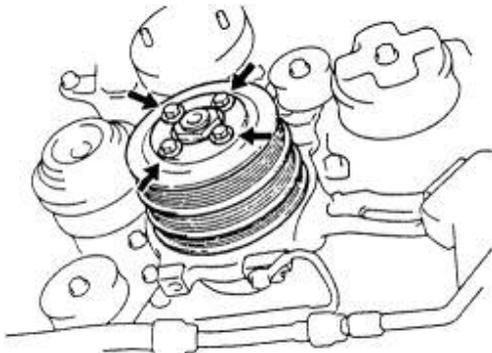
Remove these four bolts retaining the equipment driveshaft pulley
